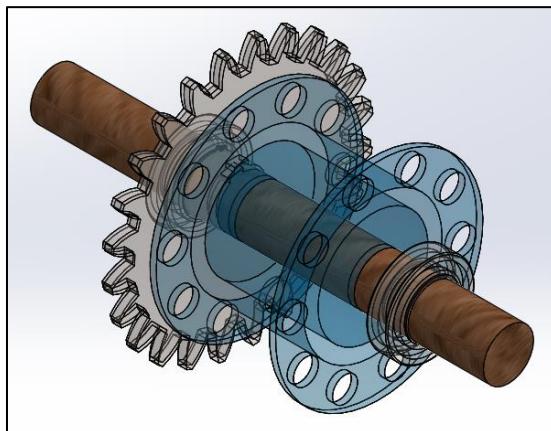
Pulley Driving Shaft Supporting a Bearing, a Gear, Two Bearings, Four Circlips On It
